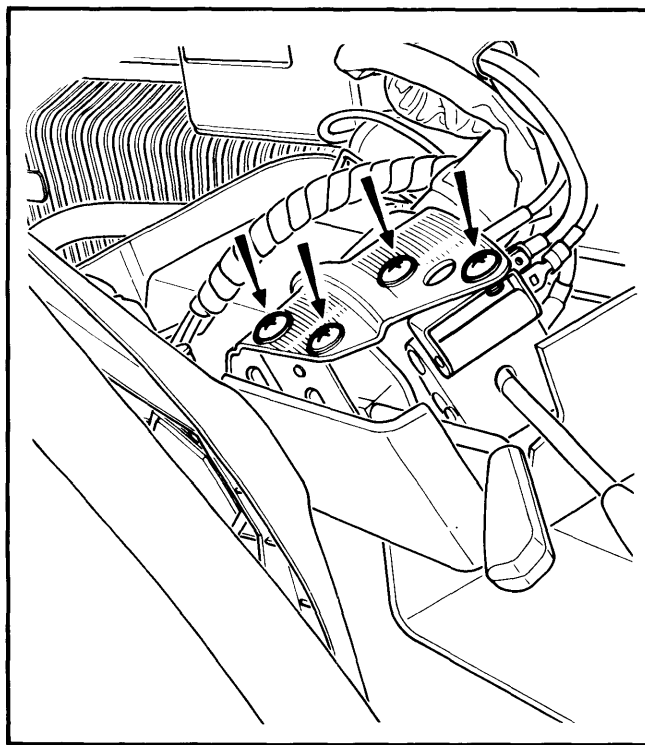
Location of Switch Assembly Retaining Screws — R-5 Shown
